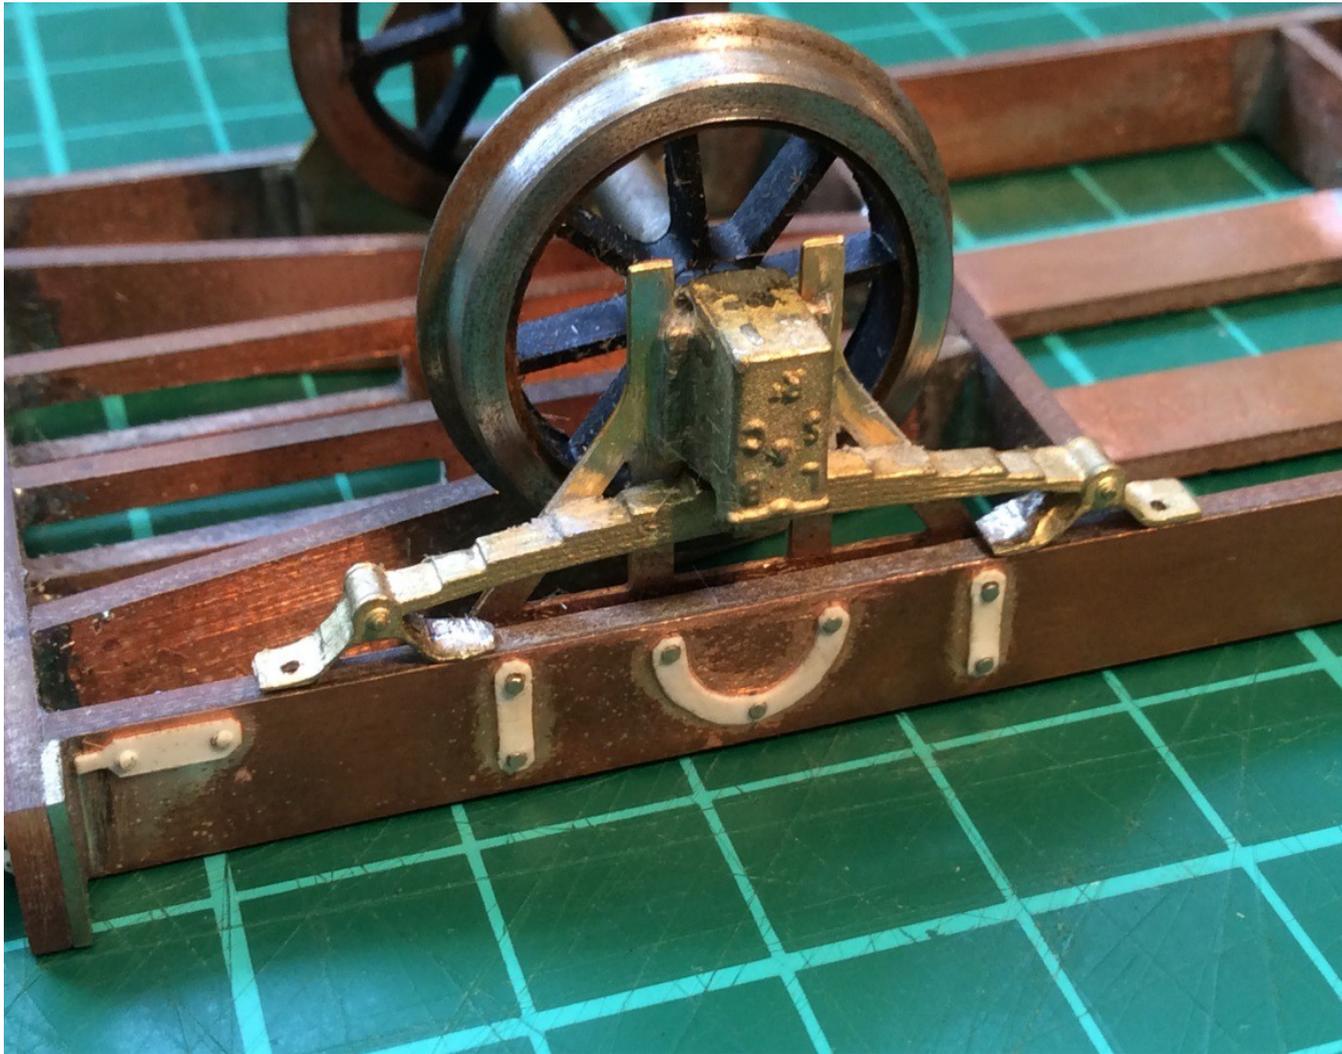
A leafspring and oil filled axlebox soldered in position onto the front of the W-iron. The axleboxes and axles have got to be fitted first to get the ride height correct. For a van to this Diagram the height from rail to the centre of the buffers is 3' 5" (24mm). Trial and error is the name of the game here. A small amount of filing or packing of the axleboxes is required. The springs can then be slid in from the side then soldered securely in place. Note the two holes drilled out for the small pins for extra security of the ends. In practice, pins were never used because the hardness of the lost wax did not warrant fitting them. Also note the individual letters on the face of the box.
